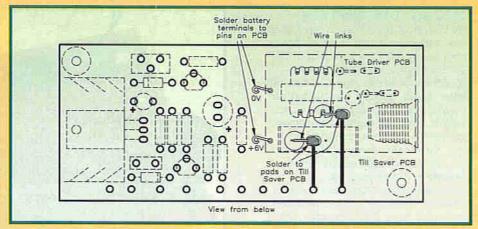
Mounting the Fluorescent Driver PCB onto the Till Saver PCB.
